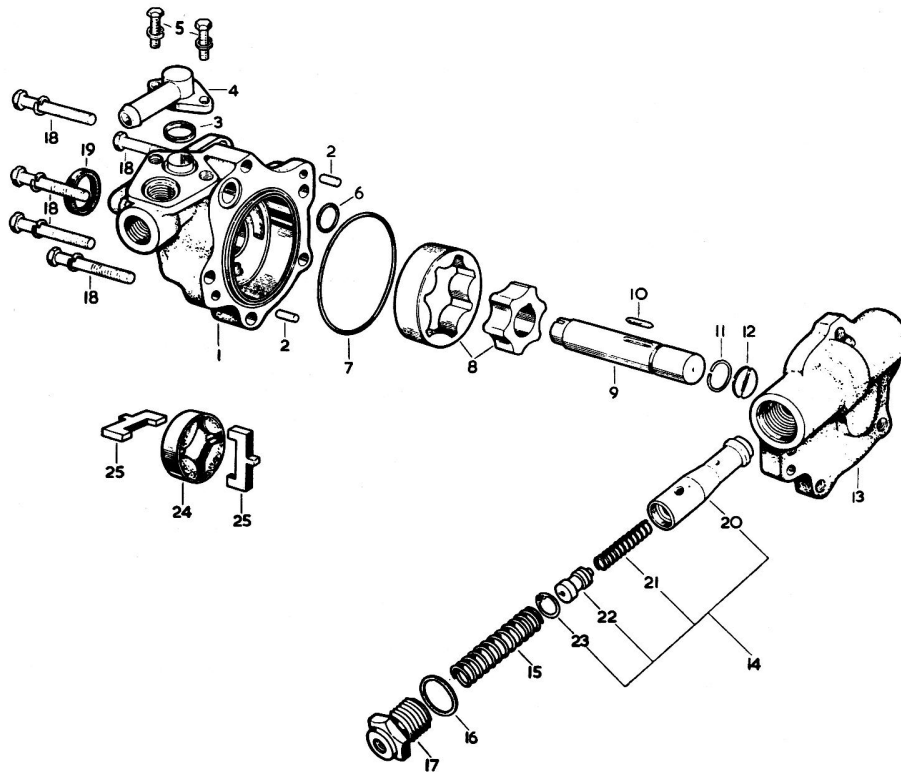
EXPLODED VIEW OF THE POWER STEERING PUMP (EARLY TYPE)
